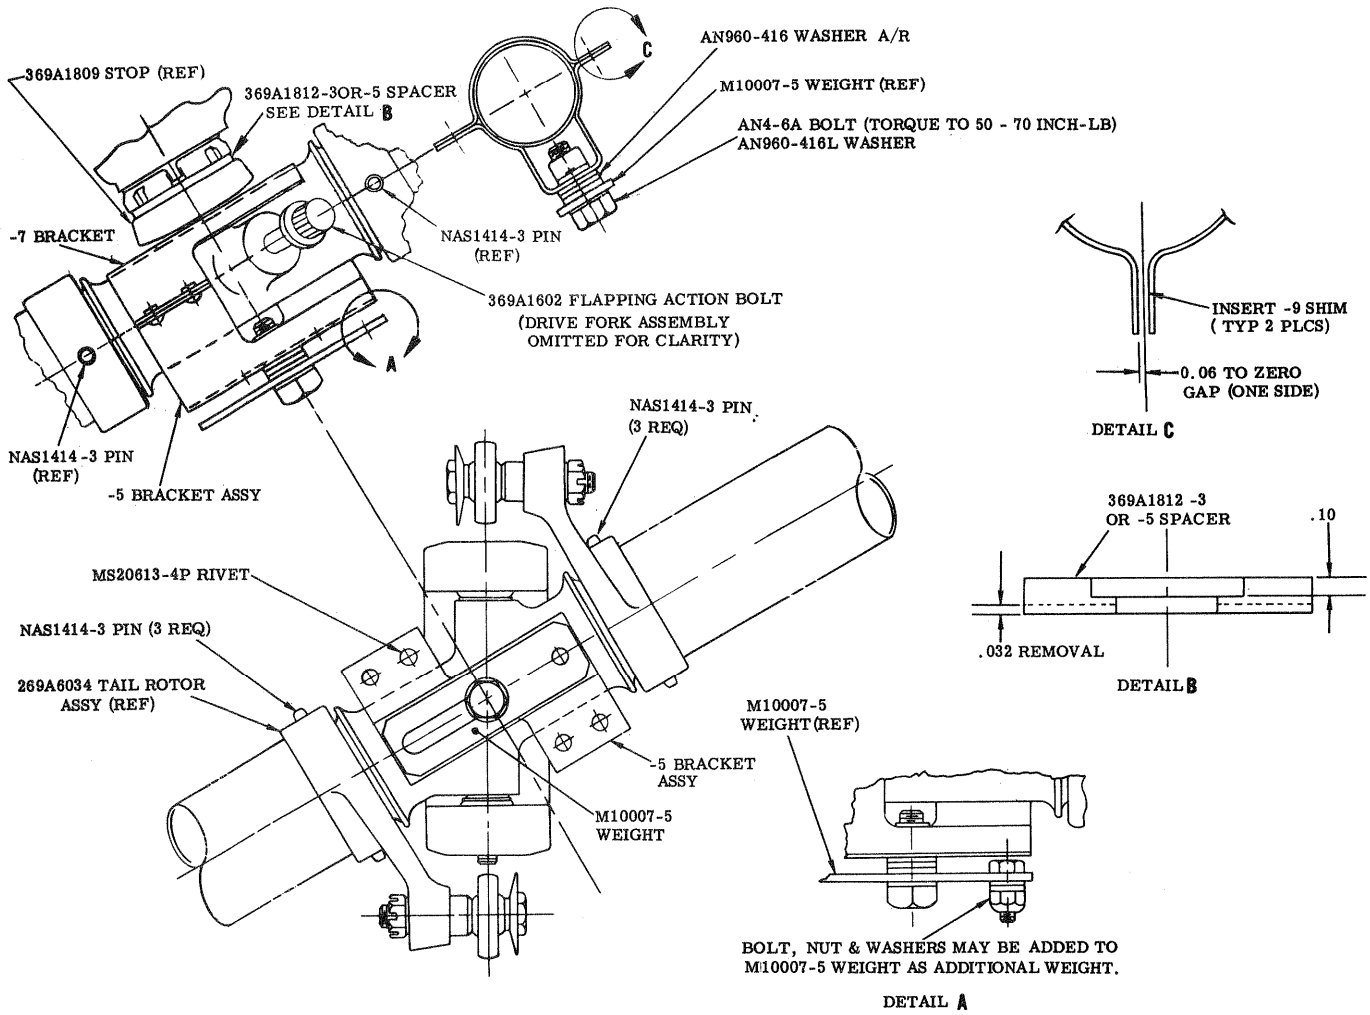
WEIGHT AND BALANCE ASSEMBLY, LOW TIP SPEED TAIL ROTOR
